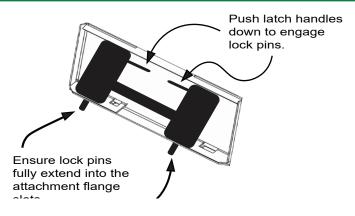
B OUICK ATTACH COUPLER LOCKED TO ATTACHMENT PLATE
